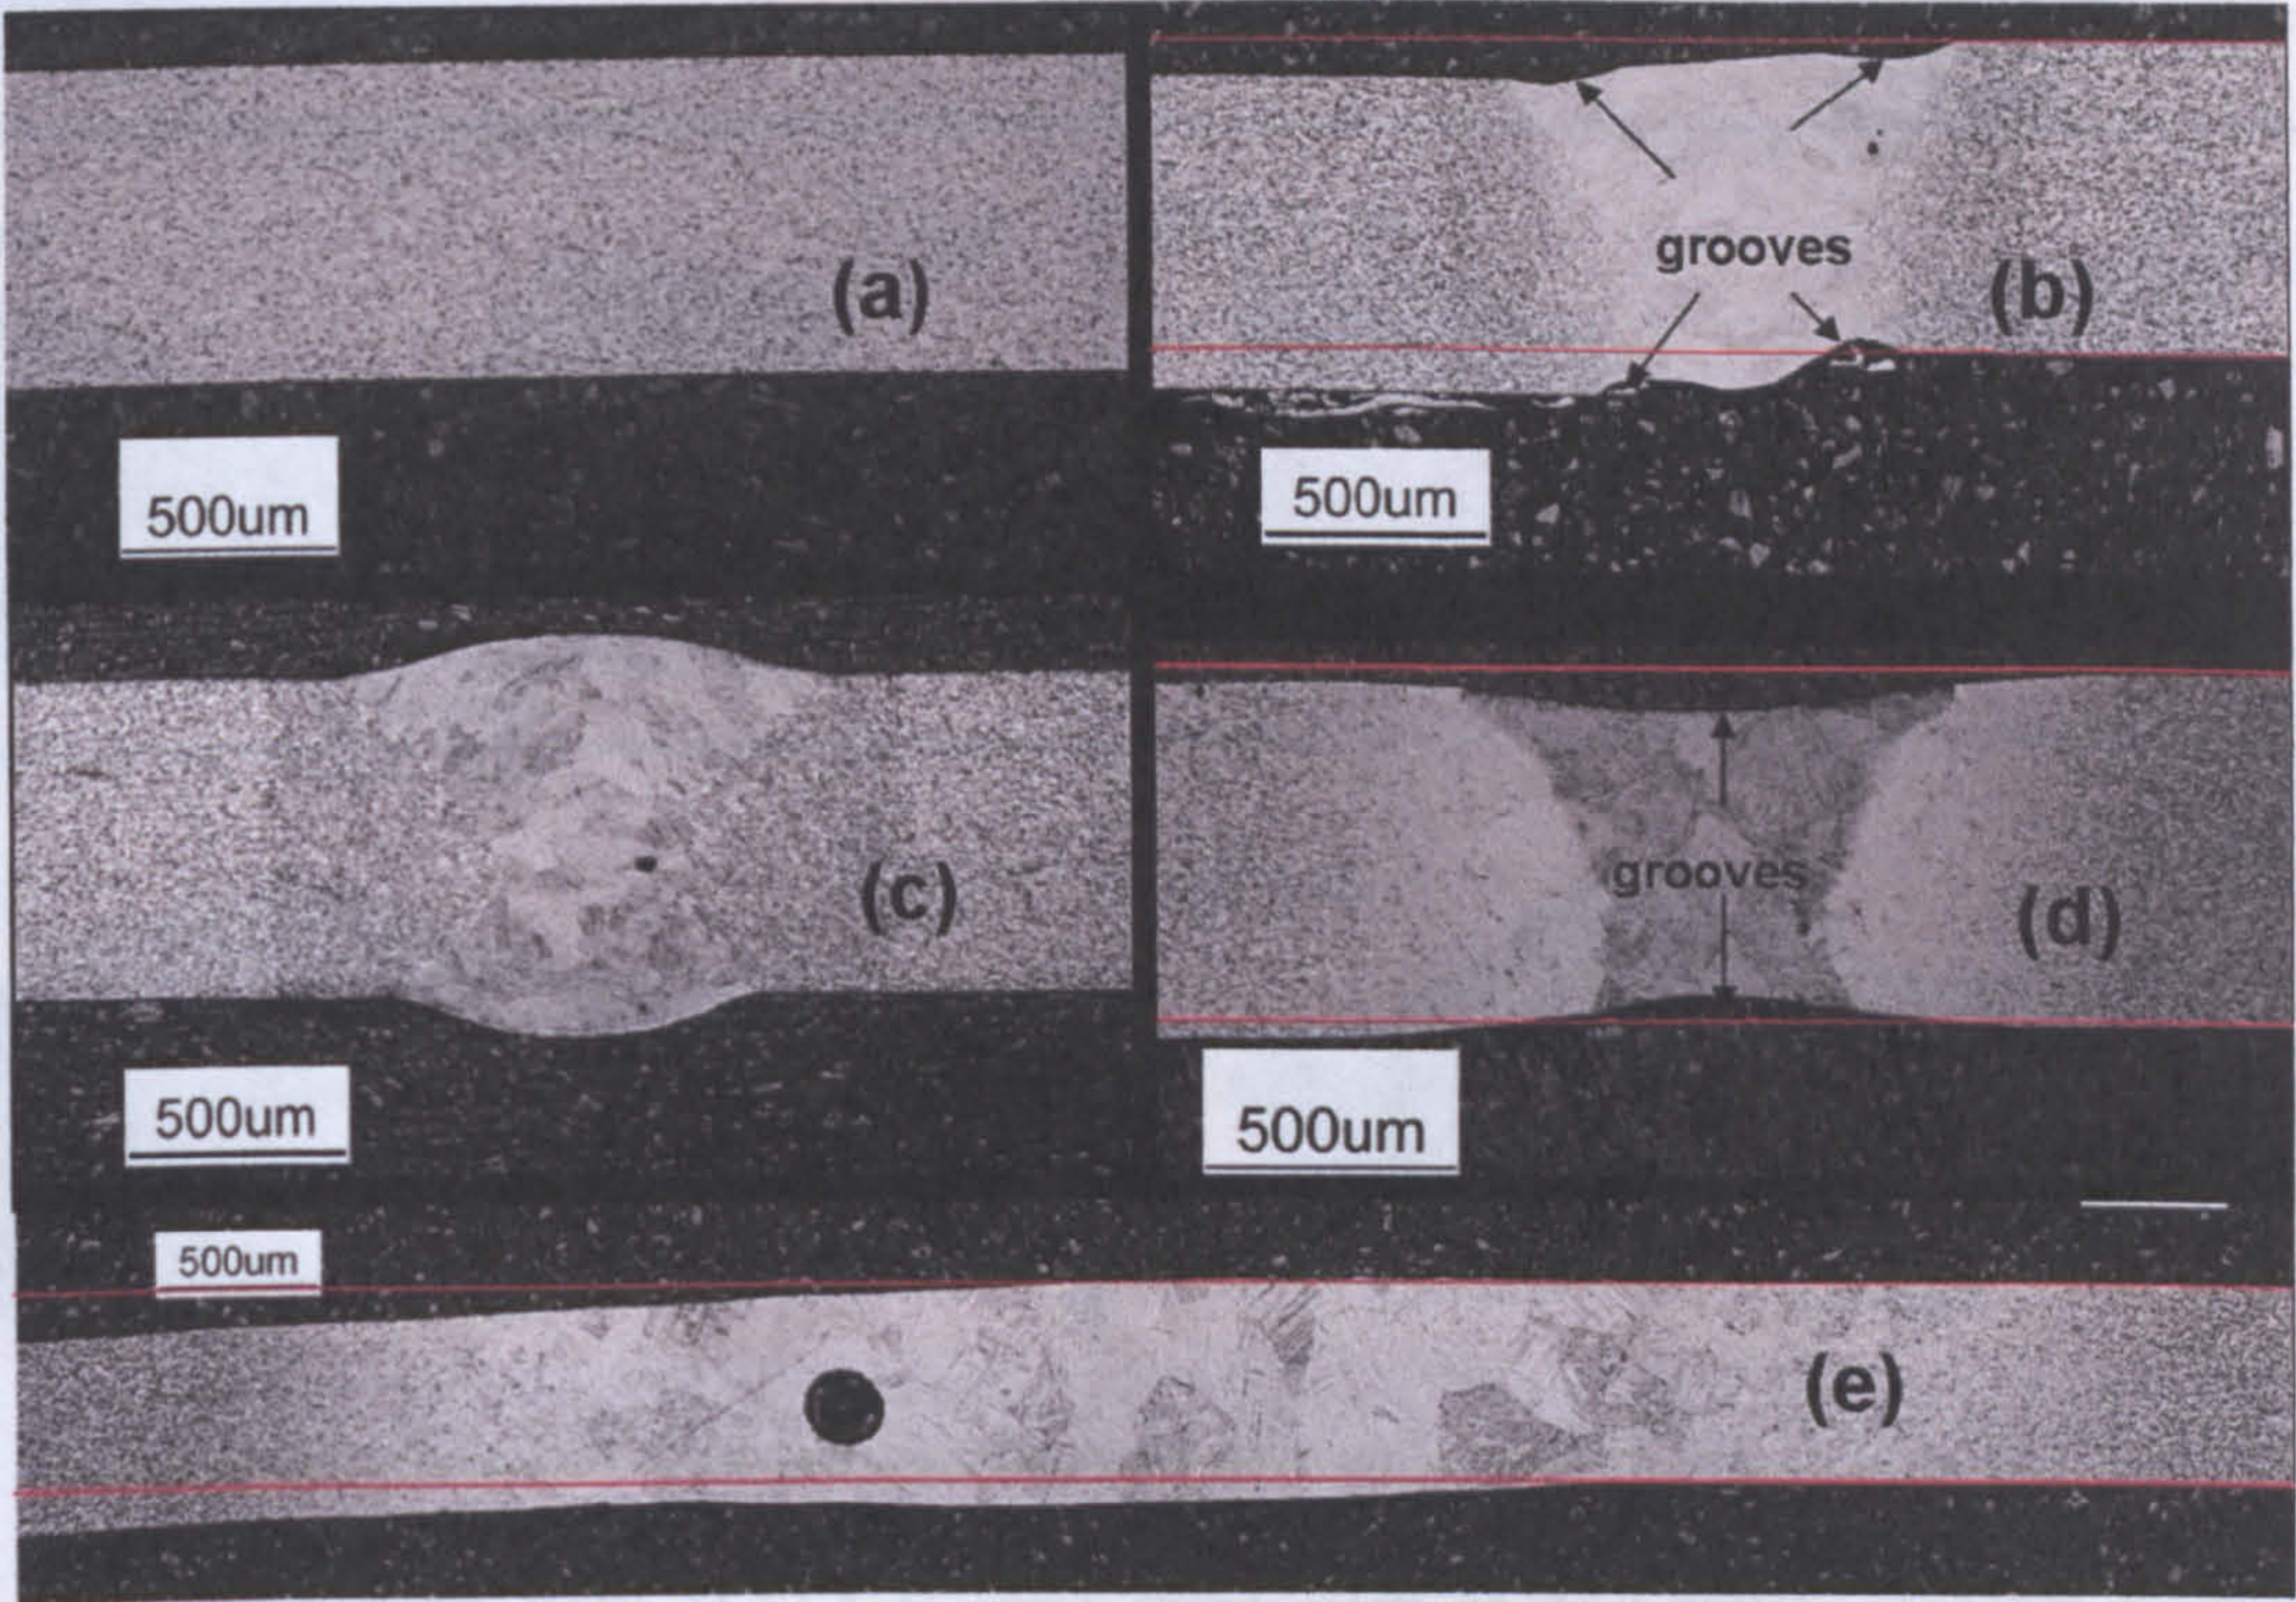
(a) shows the cross section of PM sheet which is used for welding. Figure 6.11 (b)-(e) show typical cross-sectional photographs of the weld geometries produced by the various welding methods. The structures of all the welds show that the grains sizes are quite coarse. The average size of grains by diode laser welding (DLW) is the largest (245 μm), while the average sizes by fibre laser welding (FLW) (123 μm) and Nd:YAG Welding (137 μm) can be nearly half of that of DLW. The top width of FZ by DLW (Figure 6.11e) is the largest (can be more than 4 mm). The top width of FZ by FLW (Figure 6.11b) is around 1 mm. The top width of FZ by Nd:YAG (6.11d) is around 0.94 mm. For all three types of LBW, the HAZ width is narrow compared with the width of their FZs, (DLW is less than 2 mm, FLW is around 0.18 mm, Nd:YAG is around 0.25 mm).
